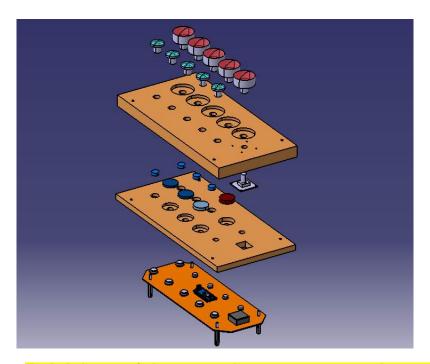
Exploded view of the optics subsystem mounting with an emphasis on photodiodes and filters mounting.
